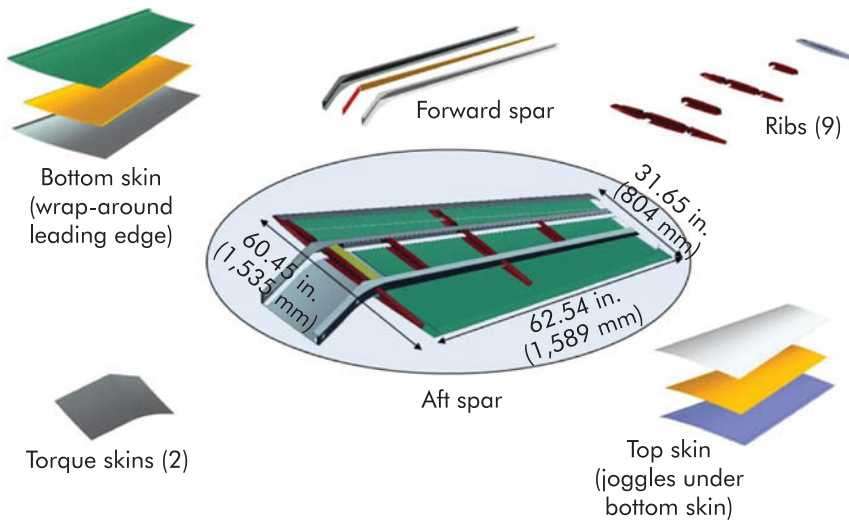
MLAS fin assembly. (Courtesy NASA)
